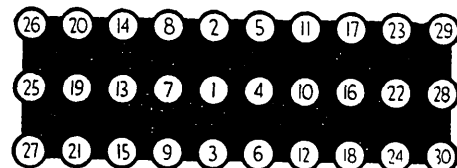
Cylinder head tightening sequence, 1935-52 eight
